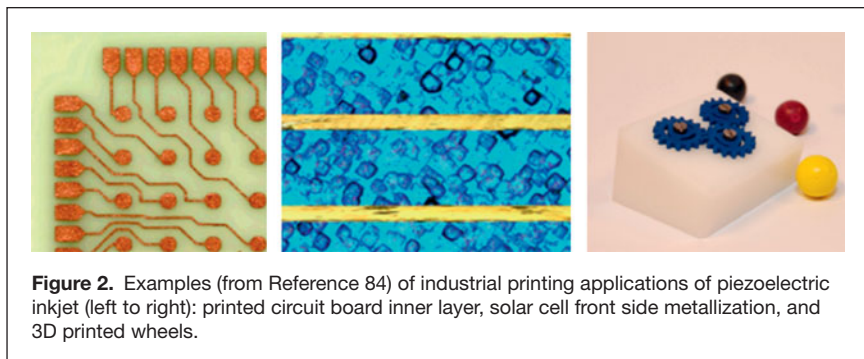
Examples (from Reference 84) of industrial printing applications of piezoelectric inkjet (left to right): printed circuit board inner layer, solar cell front side metallization, and 3D printed wheels.
